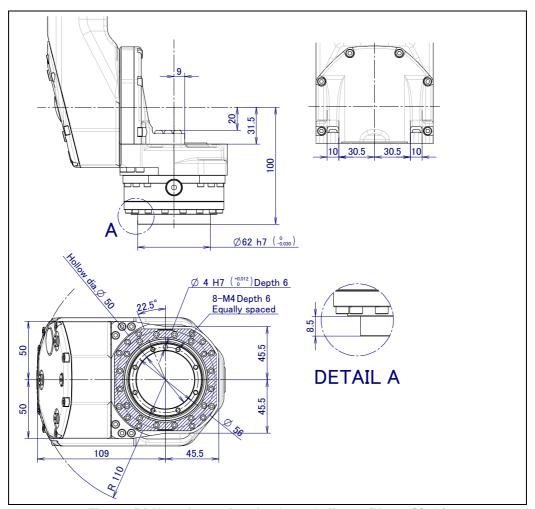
(b) Mounting surface for the end effector (M-710*i*C/12L)
